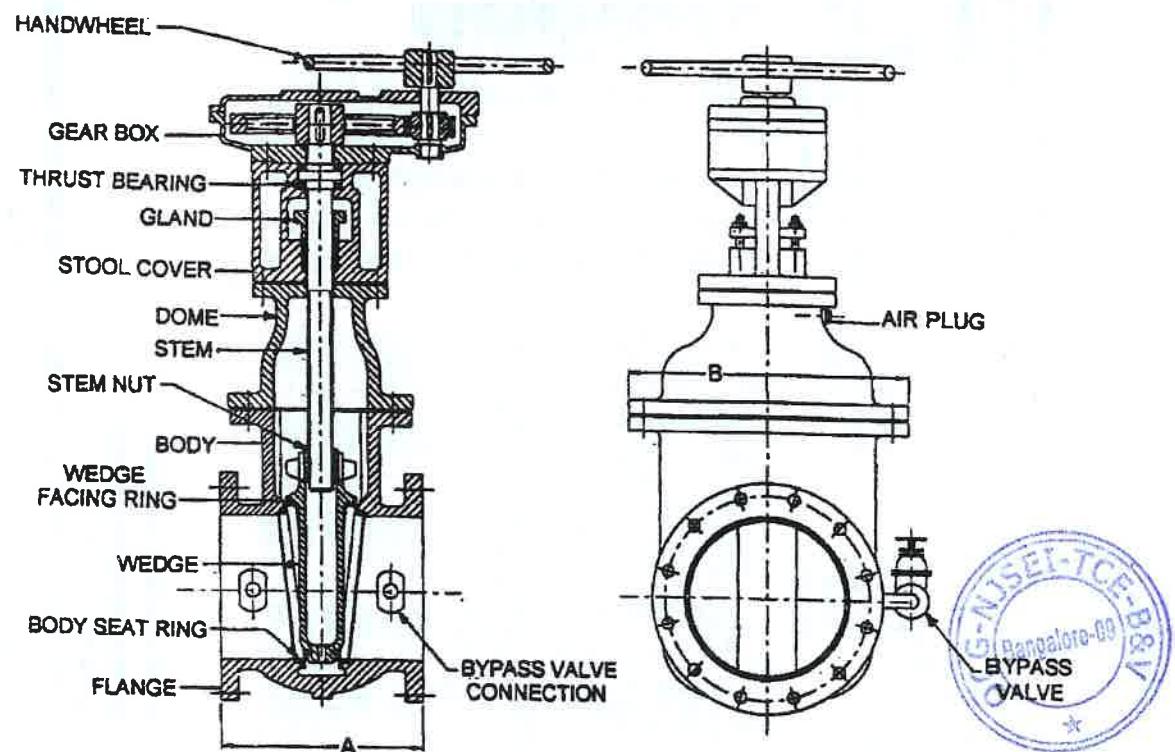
C TYPICAL SKETCH OF A SLUICE VALVE WITH BALL THRUST BEARING AND SPUR GEAR ARRANGEMENT
